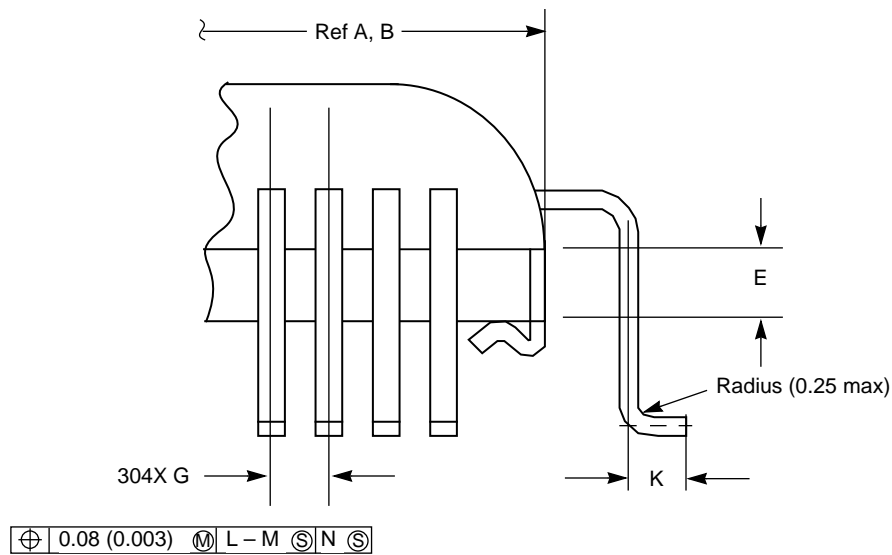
IBM C4-CQFP Mechanical Dimensions—View P
